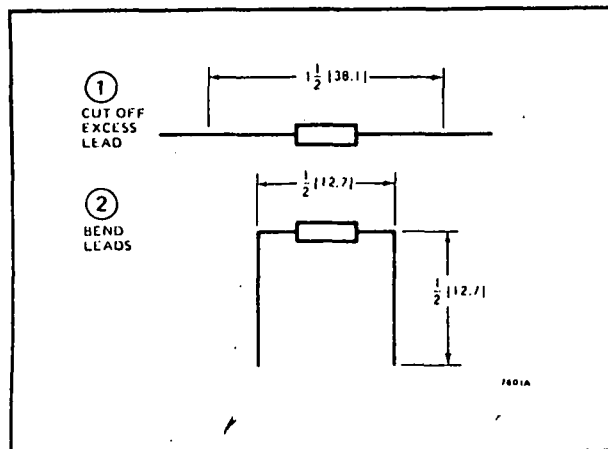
PLUG-IN RESISTOR PREPARATION. DIMENSIONS IN INCHES [MILLIMETRES IN BRACKETS].
